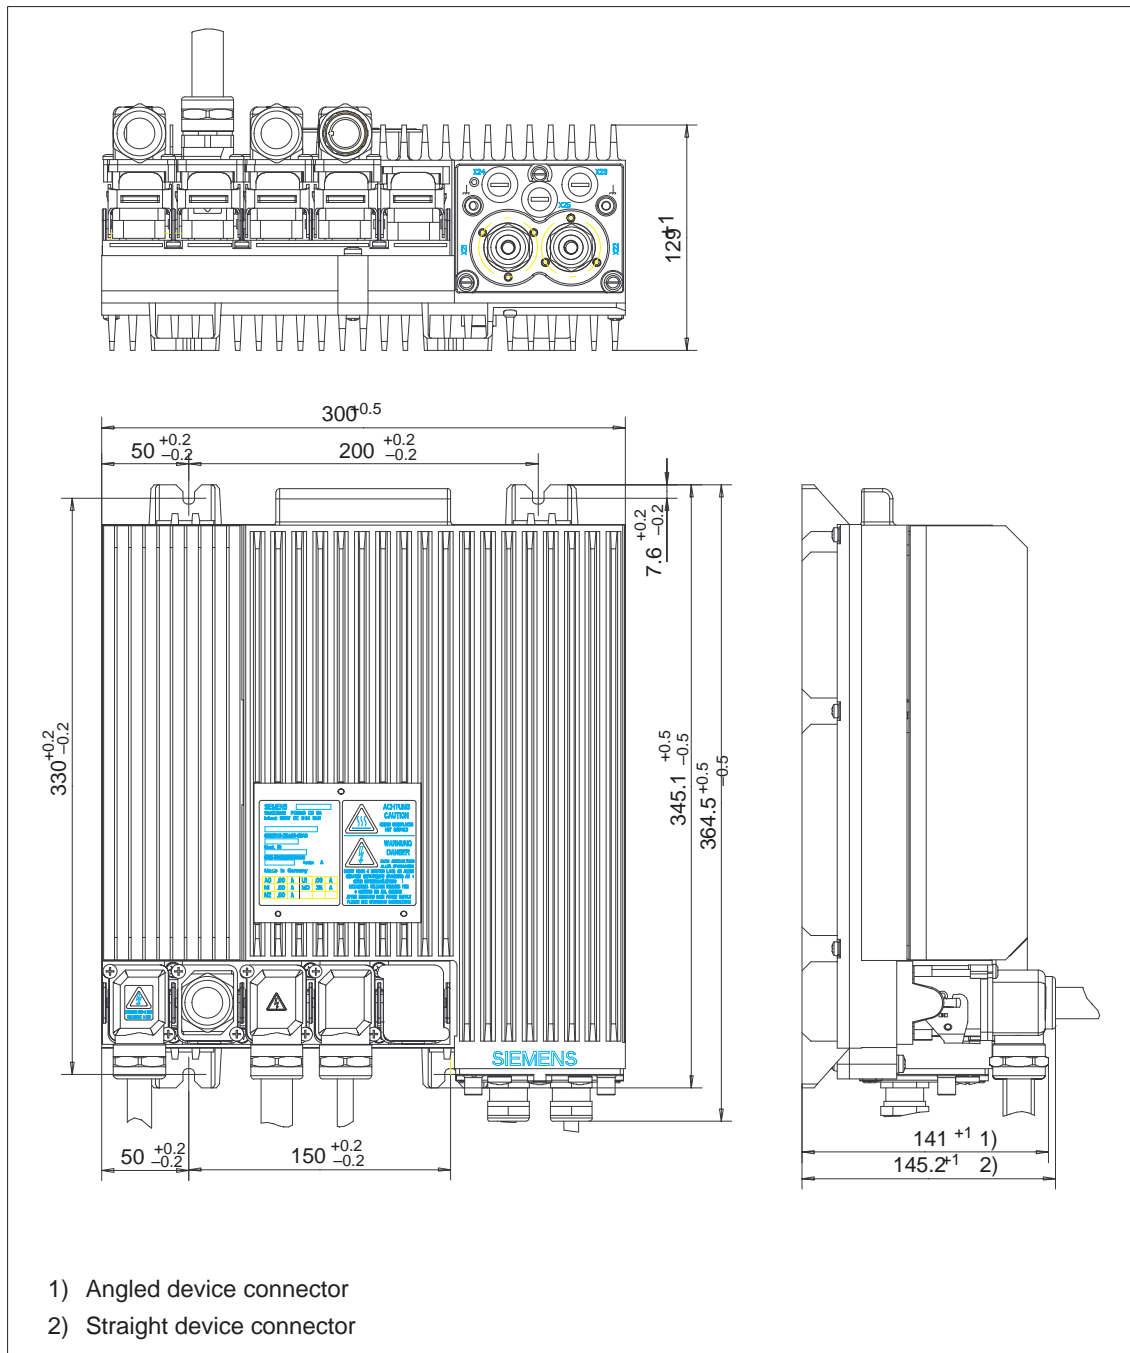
Dimension drawing POSMO CD 9 A, 6SN2 703-2AA0□-0BA1
